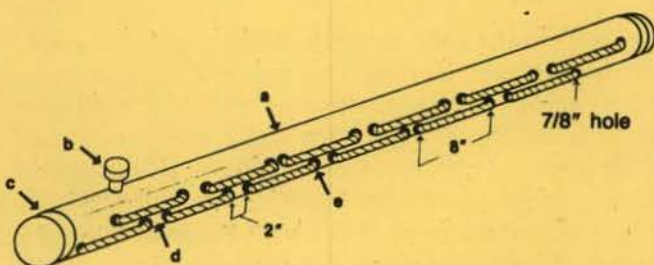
Typical rope wick applicator showing the components assembled. Materials are (a) 3-inch PVC pipe; (b) capped fill spout — PVC; (c) end cap — PVC; (d) wick of 1/2-inch diameter soft braided nylon marine rope; (rubber bushing (for 1/2-inch rope) with compression cap.
